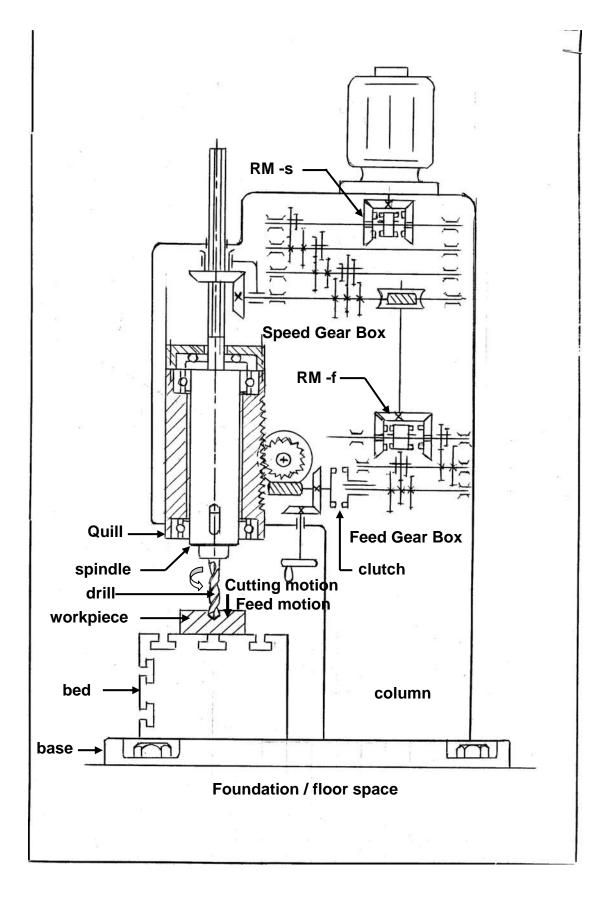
Schematic view of the drives of a drilling machine
